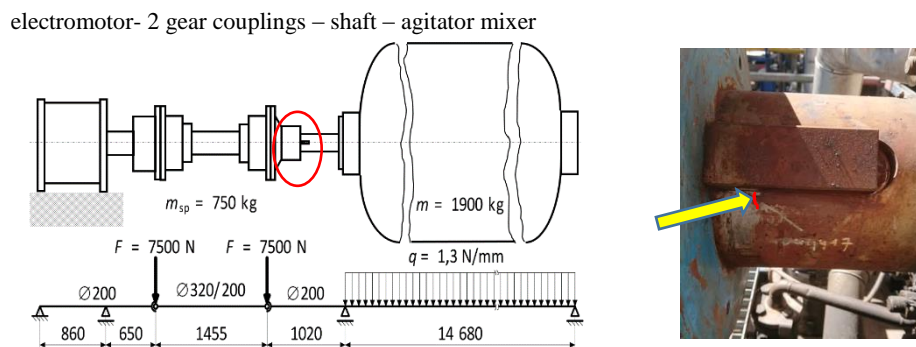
The drive assembly of the mixer as well as the beam model of the assembly (left) and detail of the shaft with the keyed joint and the area of the initiated crack from the keyway (right)
